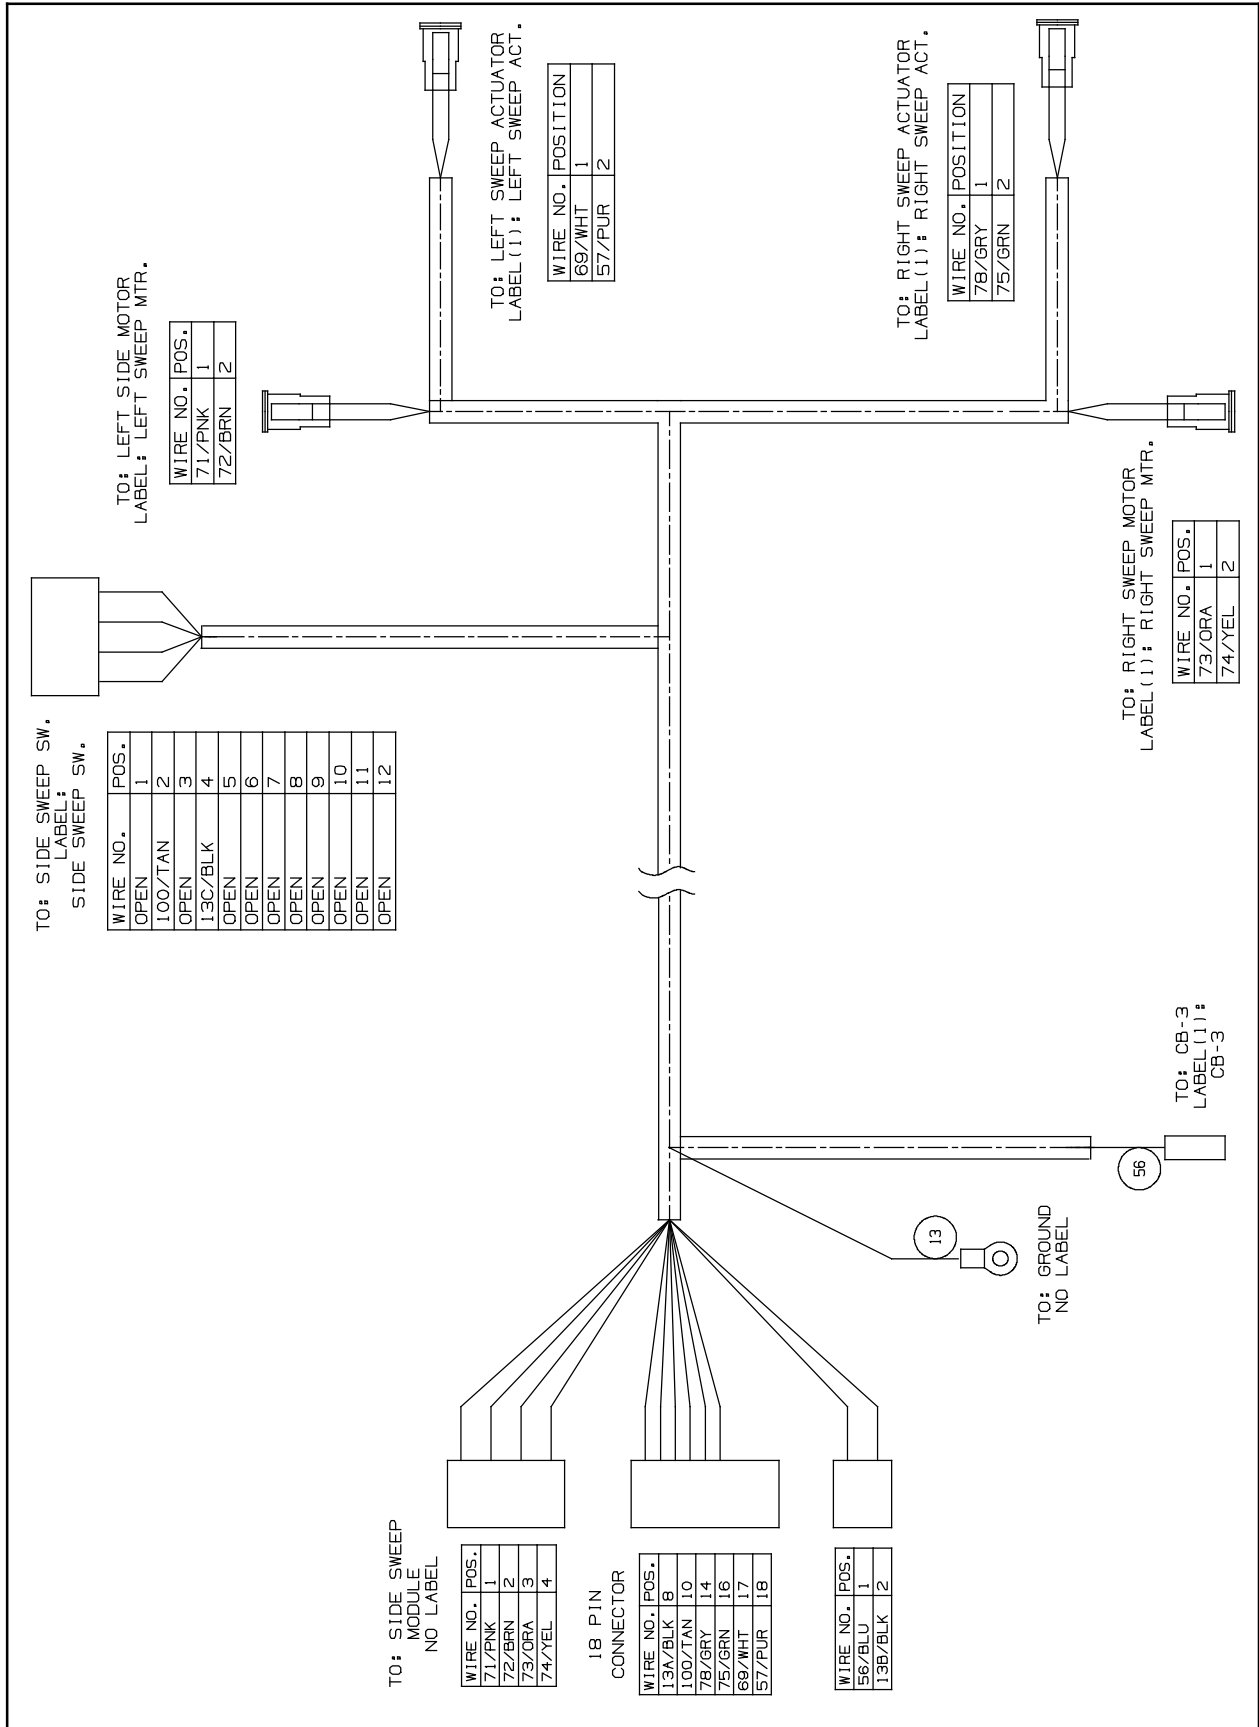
Sweeping Side Brush Wire Harness Group - Must Be Factory Installed
